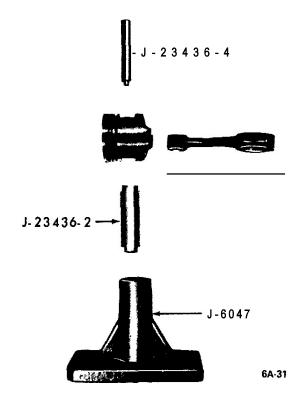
A-3 1 Piston Pin Removal Tool Layout - 1.9 Engine
